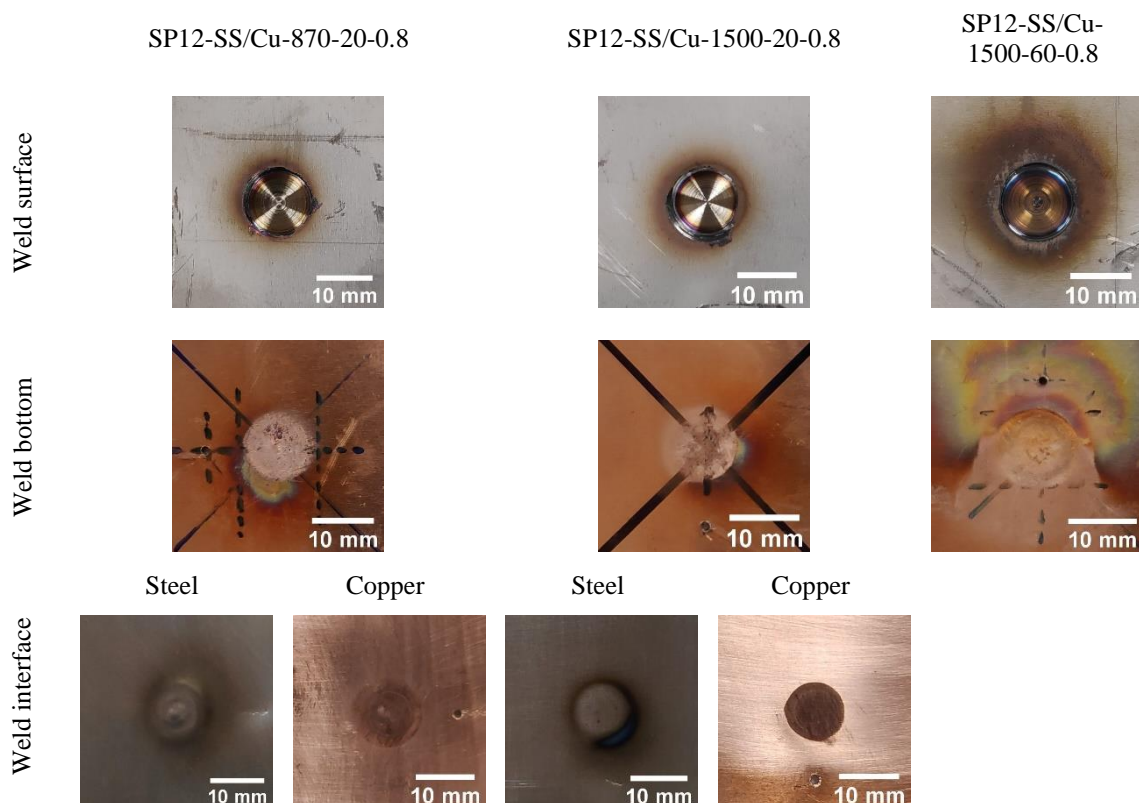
Weld surface, bottom, and interface from SP12-SS/Cu-870-20-0.8, SP12-SS/Cu-1500-20-0.8, and SP12-SS/Cu-1500-60-0.8 welds.
